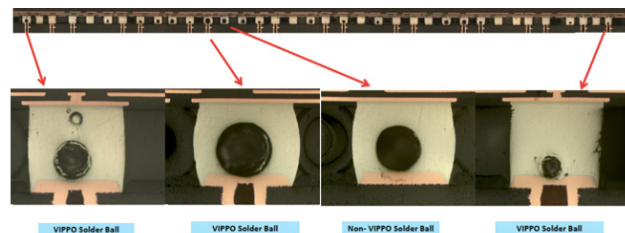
Solder Voiding and Bridging with Solder Joint Encapsulant Material B on DDR4 TV
